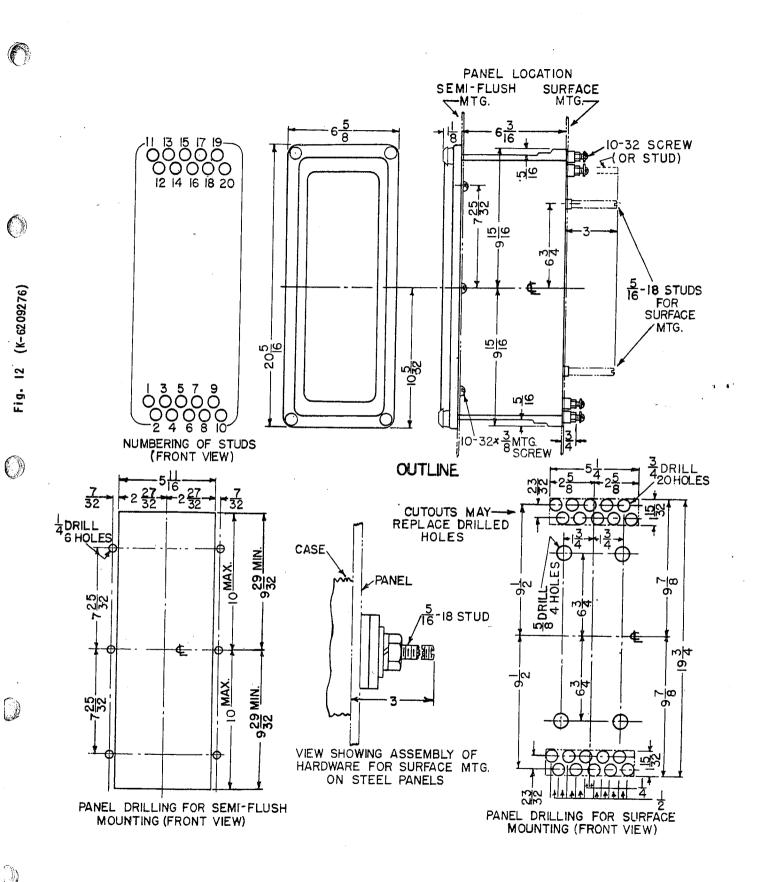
Outline and Panel Drilling Dimensions Diagram for Type CEBI3B Relay
